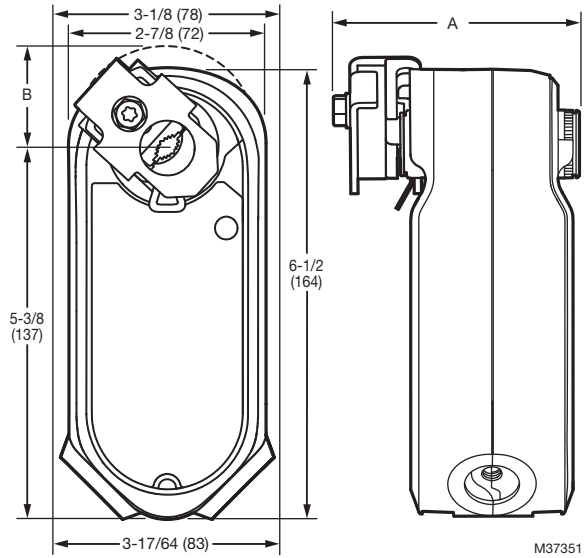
Dimensional drawing of actuator without conduit in in. (mm). See Table 2 for A and B dimensions.
